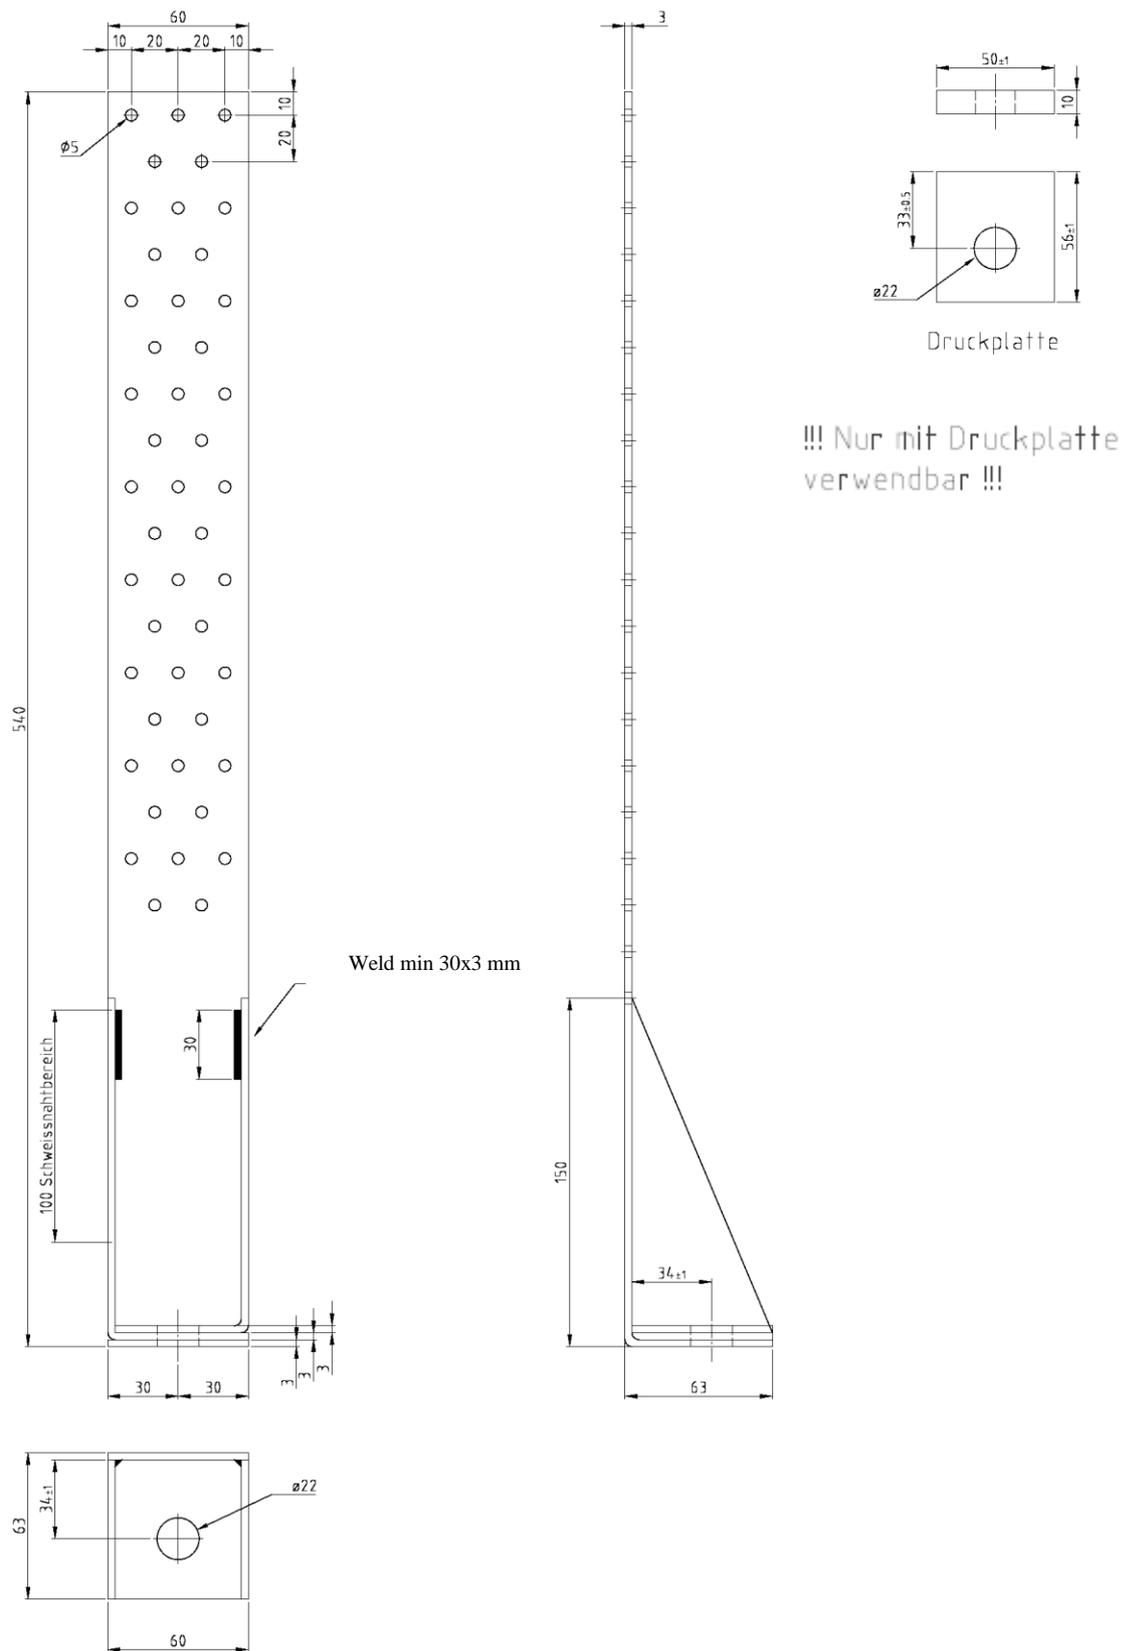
Dimensions of type GH HT28 60/540 Big Hole (with washer 56x50x10)
